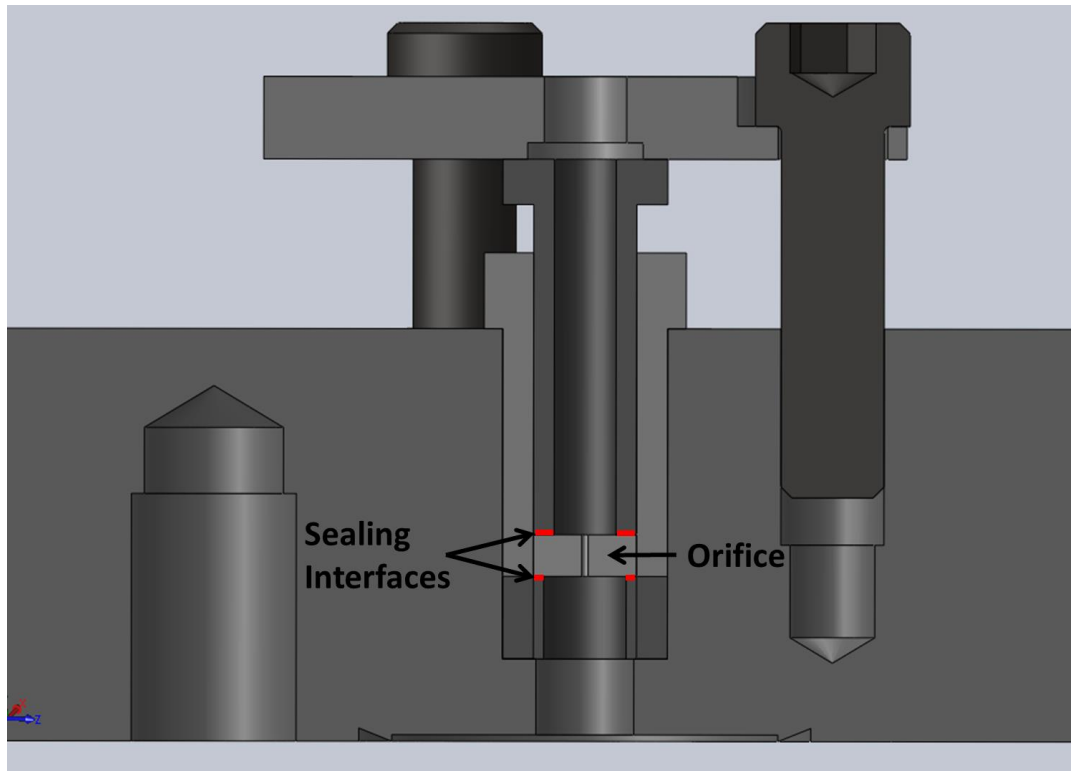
Schematic of the orifice clamping assembly with the sealing interfaces labeled.
